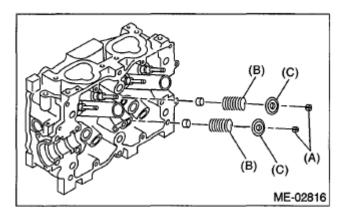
Installing Valve Spring And Retainer Using Valve Spring Remover ST (499718000) Courtesy of SUBARU OF AMERICA, INC.
